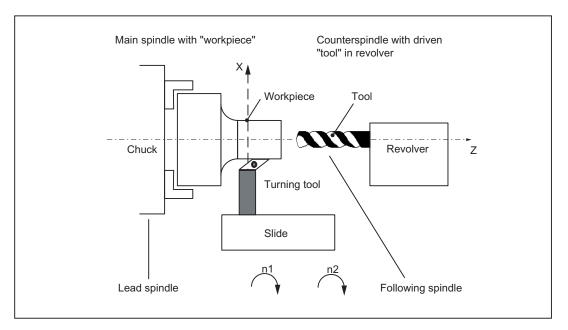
Application on a single-slide turning machine with turret about Z axis
